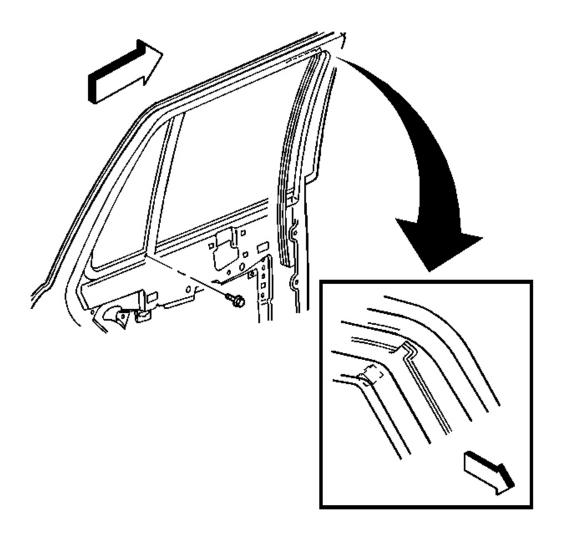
Identifying Weatherstrip/Run Channel Courtesy of GENERAL MOTORS CORP.
